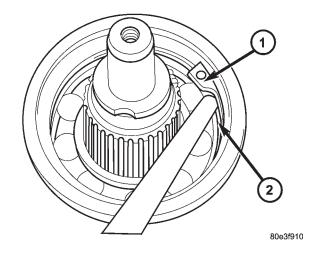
Remove Rear Output Shaft Retaining Ring - Typical
